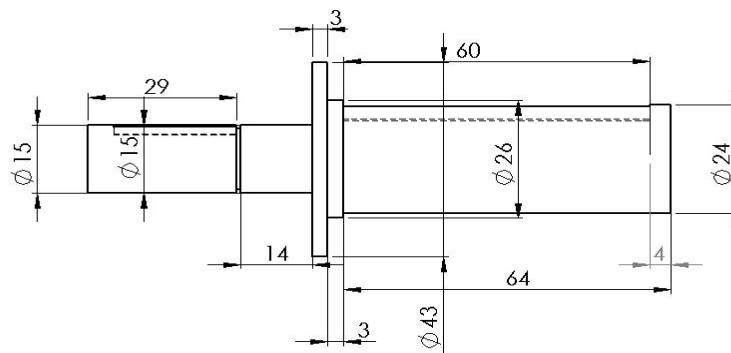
Shaft with The location of support bearing is shown schematically. There are two key seat for fixing gear (on lift-side) and wheel (on the right-side) with the shaft.
